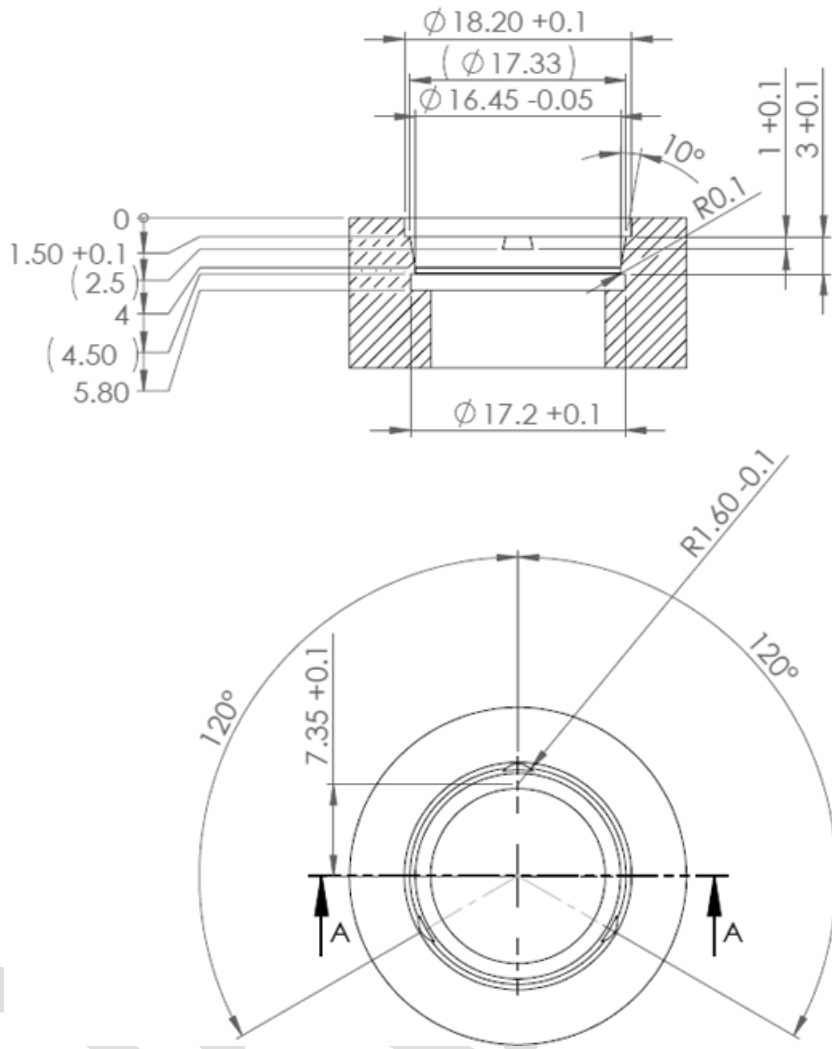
Dimension drawing: Workpiece drill hole for mounting the MDS D522 special version
